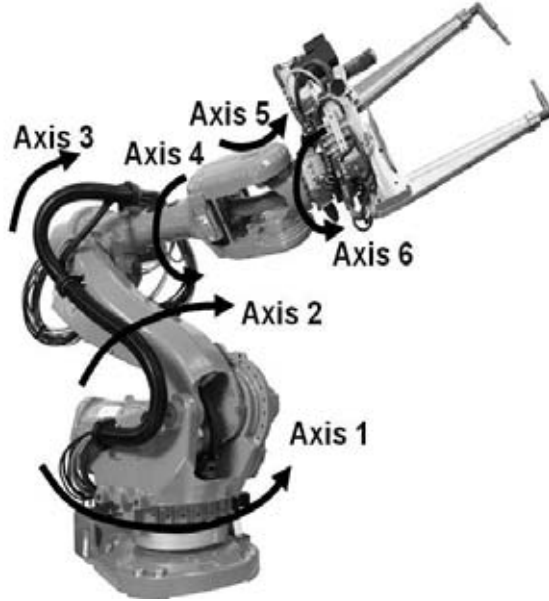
IRB6600ID from ABB equipped with a spot welding gun.
